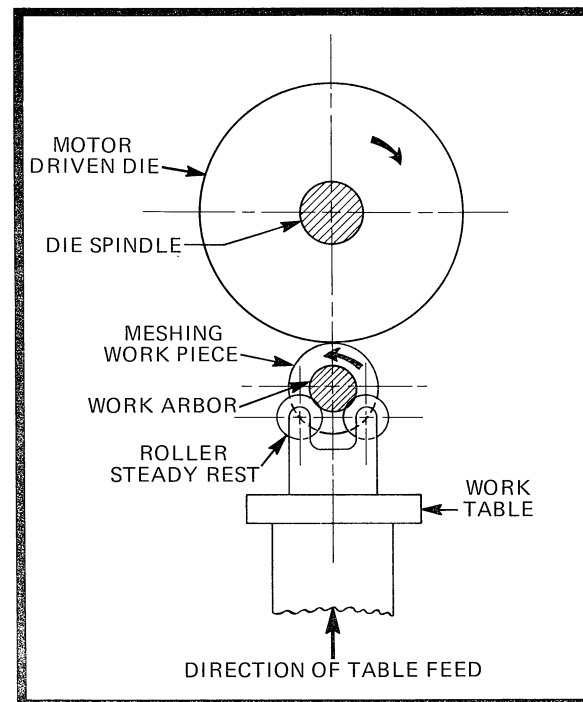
Operating principle of single-die gear roll-finishing.
